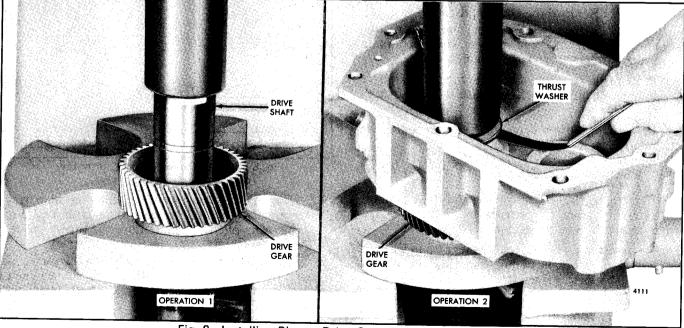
Installing Blower Drive Gear Shaft in Drive Gear
